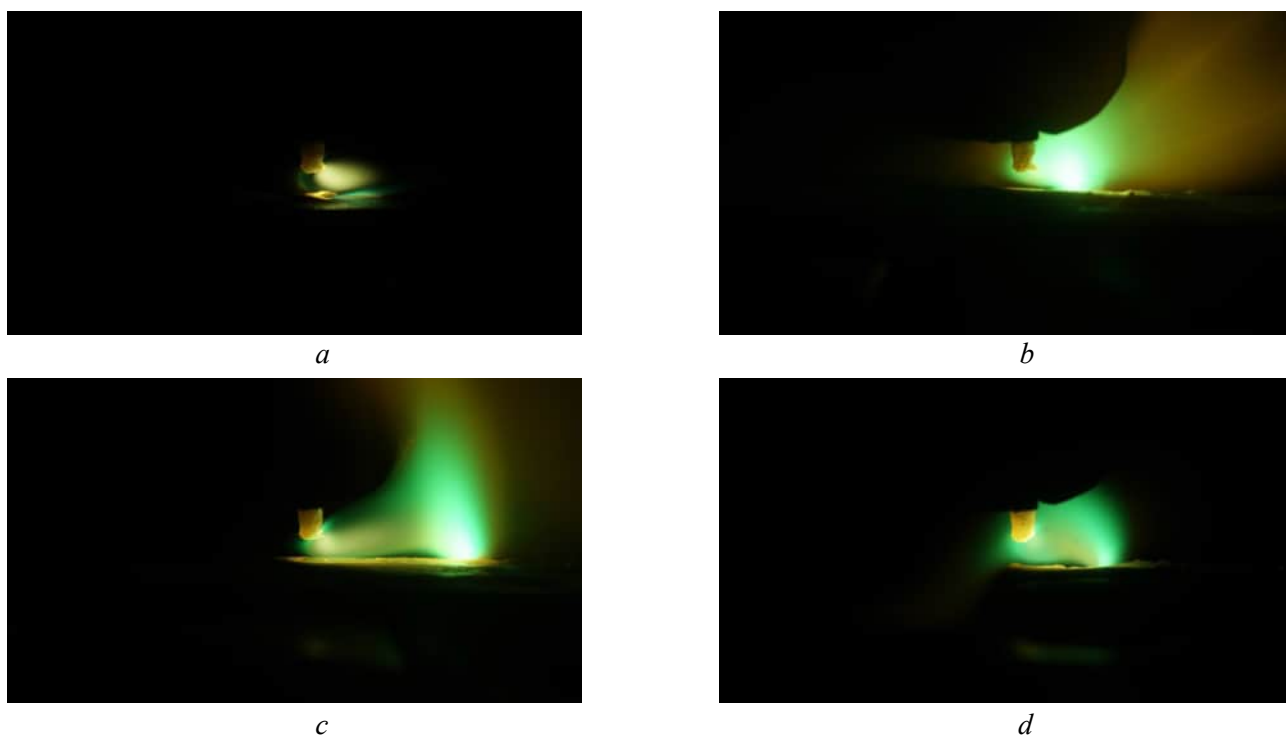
The process of welding steel *St3* with applied flux SiO_2 particle size 0.08 mm using a bonding varnish:
